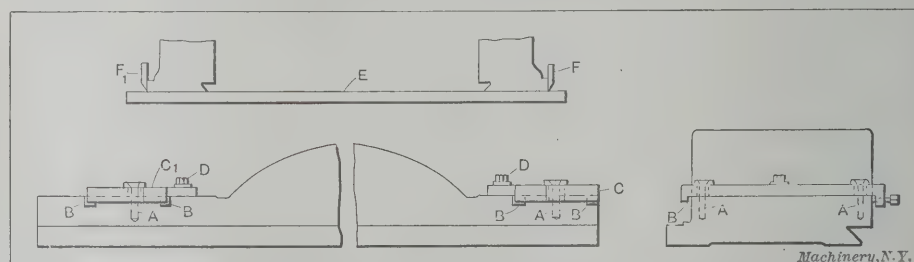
Jigs for Drilling Stud Holes in Back of Cross-rail. Setting of Jig *C1* Endwise, is accomplished by transferring Measurement from Housings by Means of Wooden Straightedge *E
